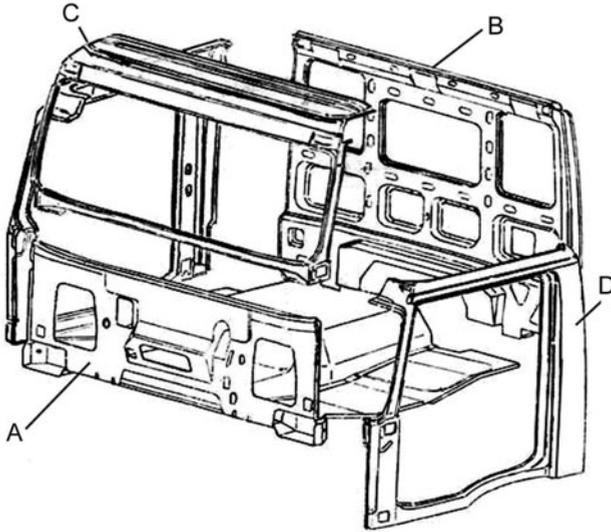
Stamped sheet main sub-assemblies of a truck cabin: A) floor assembly; B) back panel assembly; C) windshield frame; D) RH and LH side frame.
